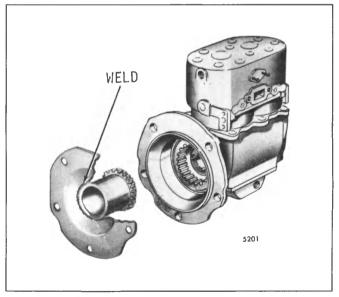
Fixture for Holding Drive While Installing or Removing Slotted Nut
